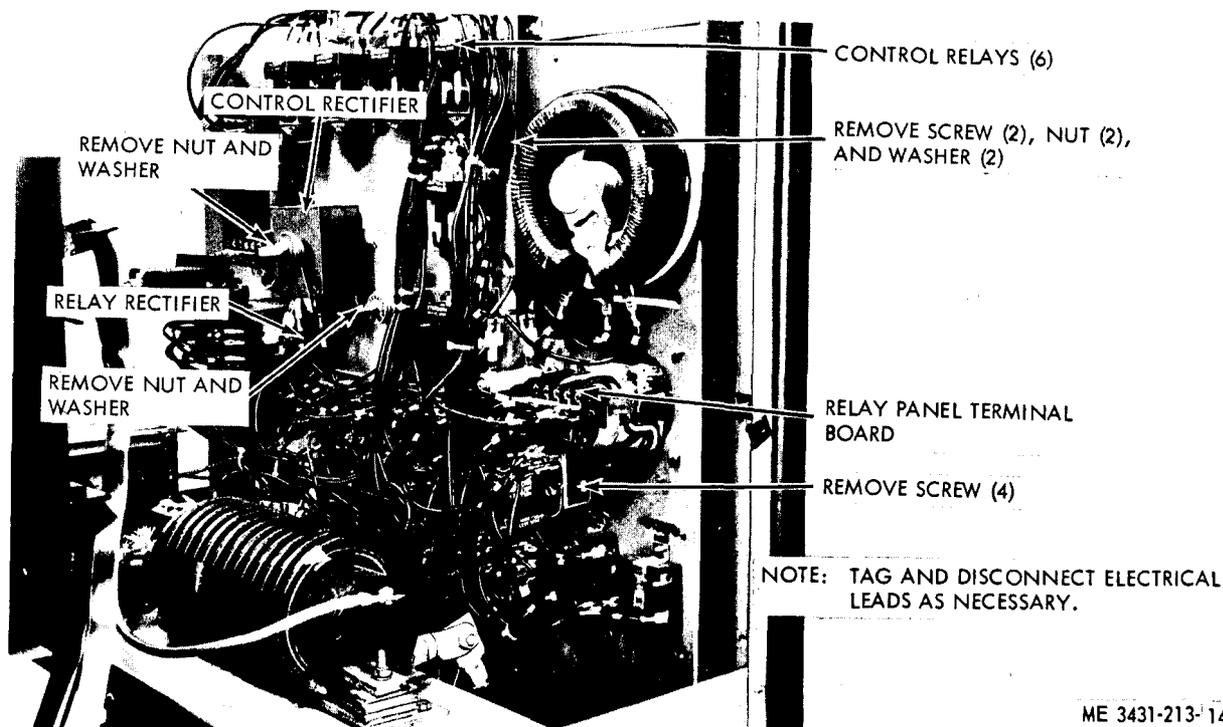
Control rectifier, relay rectifier, control relays, and relay panel terminal board, removal and installation, Model 2100H2007.
